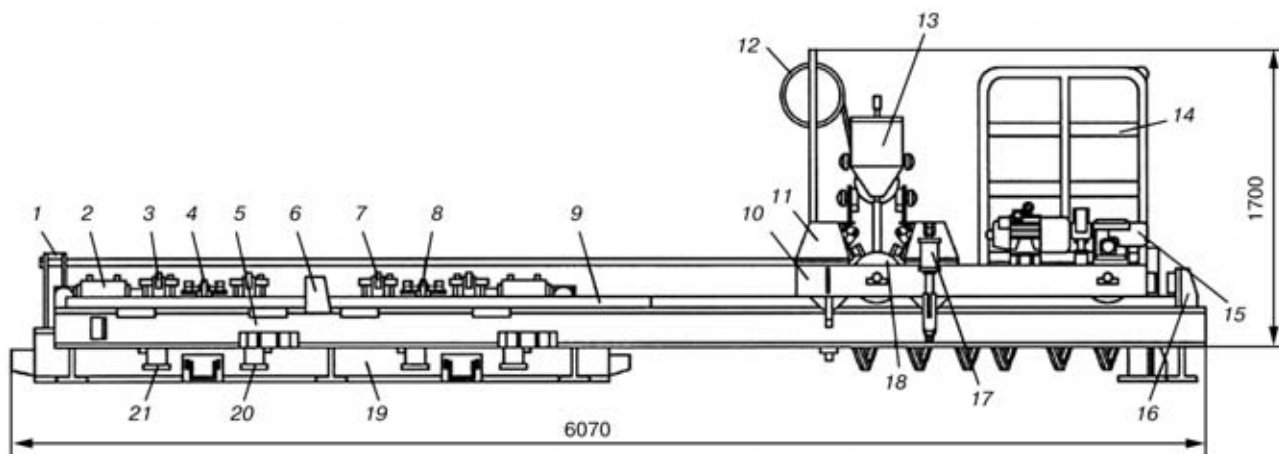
Installation for assembly and automatic welding of end wall sheathing: 1, 16 — rest; 2 — stop pneumatic cylinder; 3, 7 — hinge rests; 4, 8 — copper backing; 5 — bench; 6 — stationary rest; 9 — guide; 10 — gantry; 11 — pressure beam; 12 — power supply; 13 — welding machine; 14 — welder platform; 15 — electric drive; 17 — pneumatic centraliser; 18 — pedal pneumatic clamps; 19 — base; 20 — pneumatic clamp; 21 — rammer
